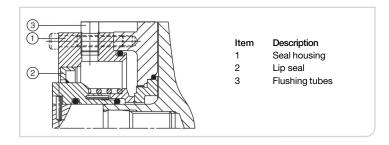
Typical externally mounted single flushed mechanical seal used in rotary lobe pumps
